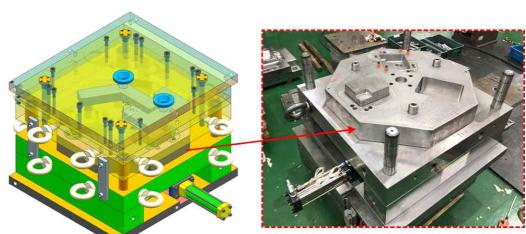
Designed and manufactured DTI mold for reservoir fluid tank injection
